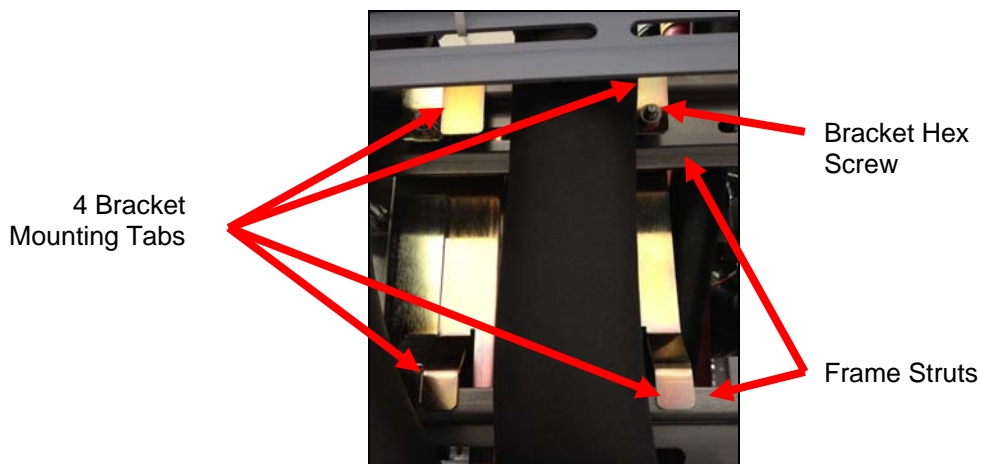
Rear View of PE Mixing Valve Installed in Cabinet
